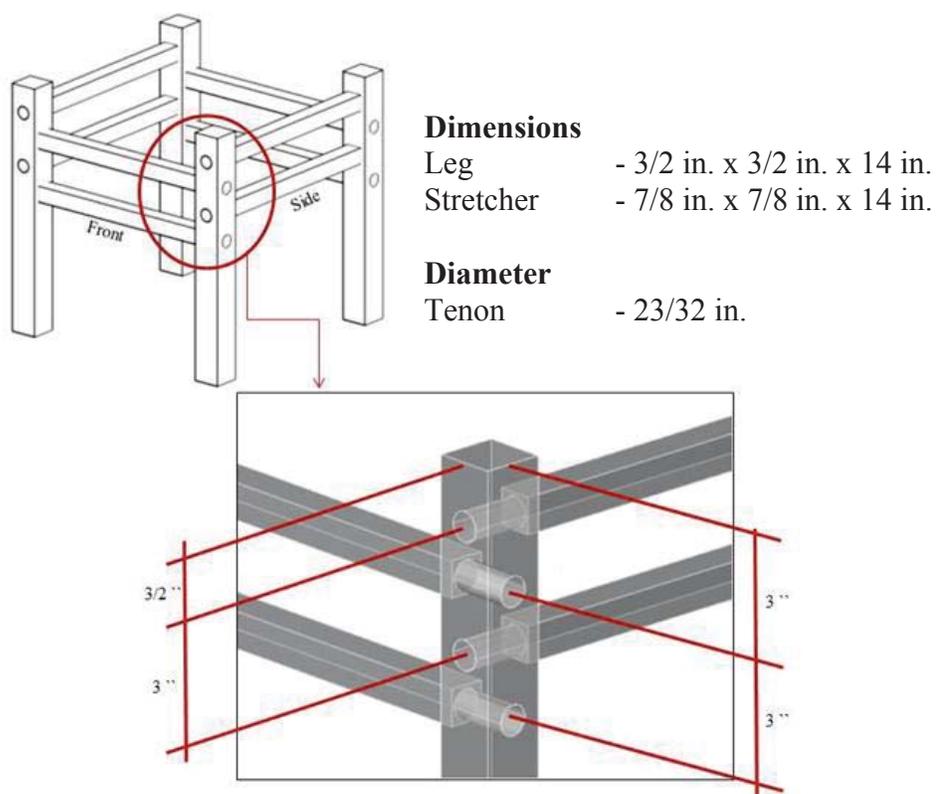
Two stretchers glued round mortise and tenon joint frame construction configuration.
